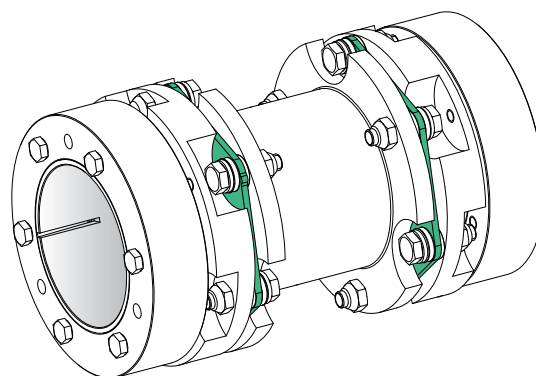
Type 953.992 (sleeve 1: H_1 , L_4), Type 953.993 (sleeve S: H_S , L_6)
